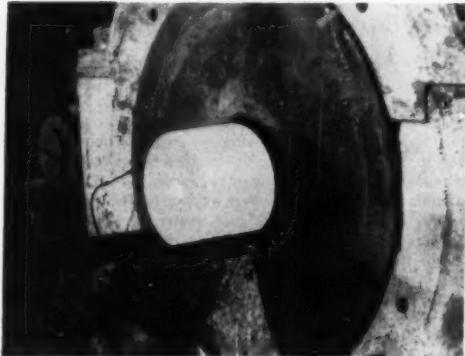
WHITE-HOT STEEL BILLET BEING INSERTED IN THE DIE CONTAINER OF THE EXTRUSION PRESS FOR FIRST OPERATION WHICH FORMS SHANK OF FINISHED PROPELLER BLADE
